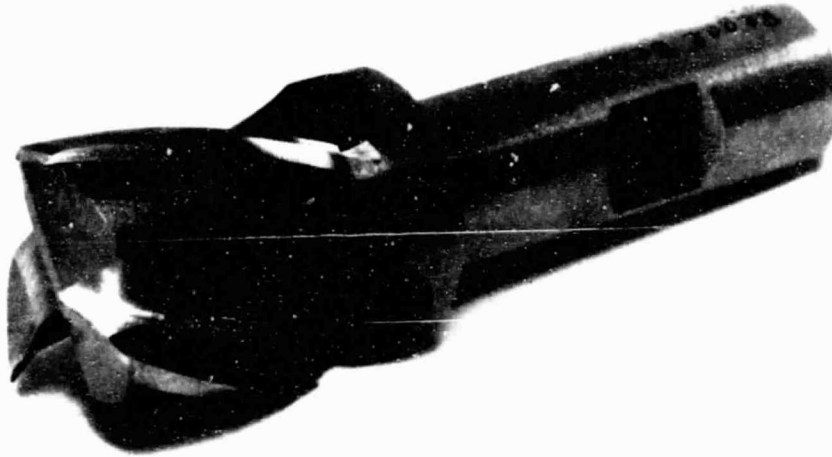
1.25-in. diameter three-flute end mill selected as roughing cutter.
